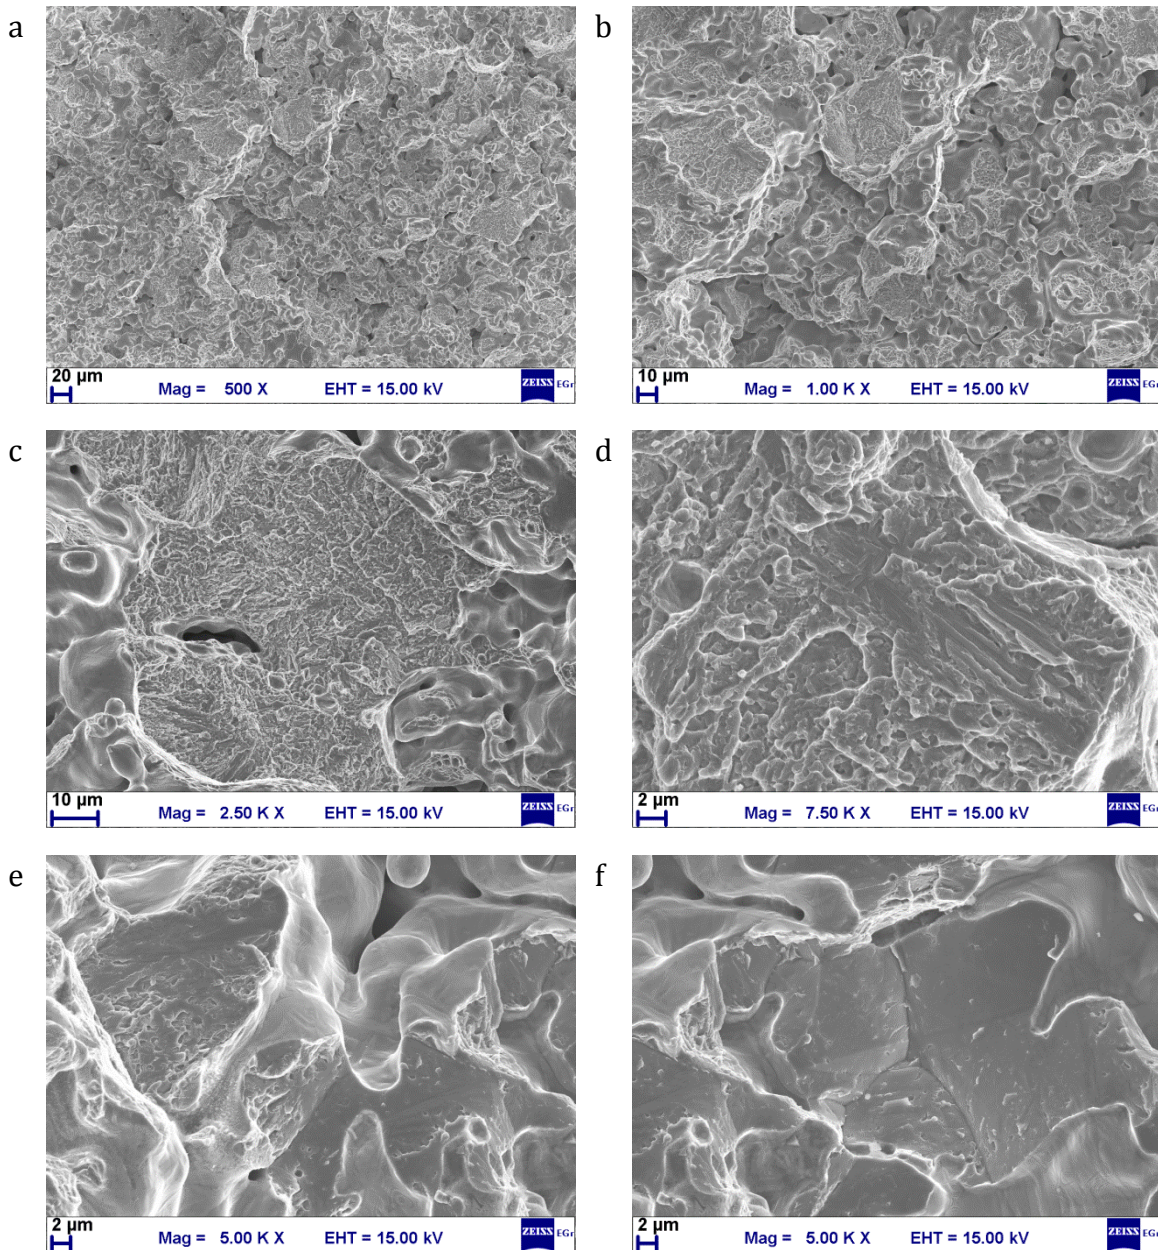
Fracture surface of DHP–DC-UT specimen showing the general appearance of the fracture surface (a, b) and observed fracture mechanisms: transparticle transgranular quasi-cleavage (c, d) and inter and transparticle intergranular decohesion facets (e, f)
